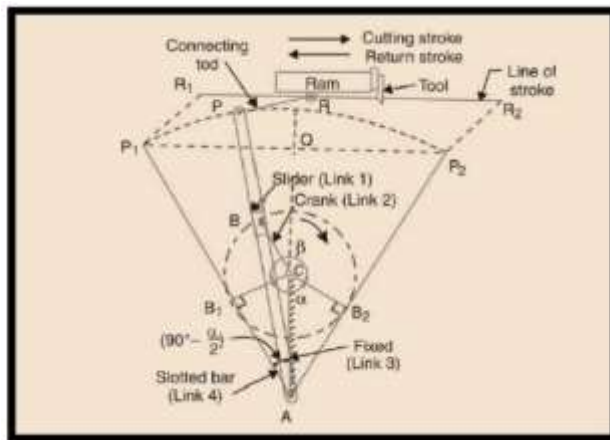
Crank and Slotted lever Quick Return Mechanism [16]
